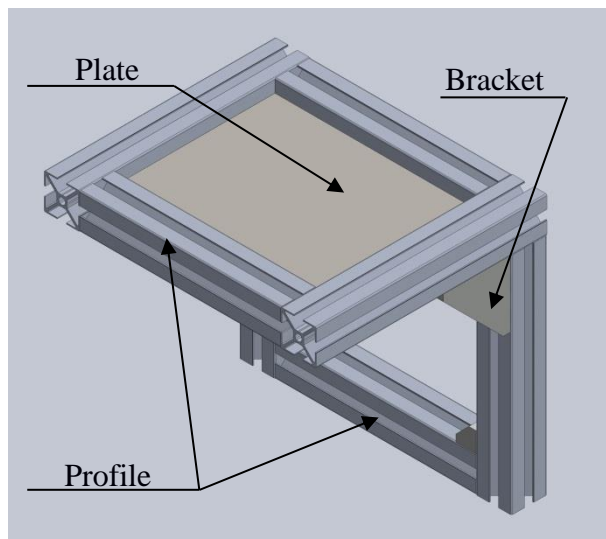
The damper bracket CAD model (Isometric view)
